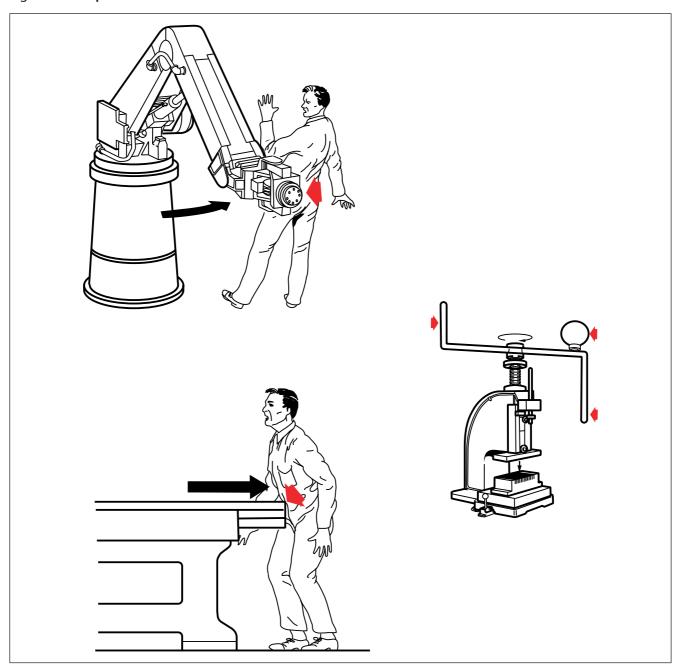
Stabbing and puncture by rapidly moving parts of machinery or pieces of material
